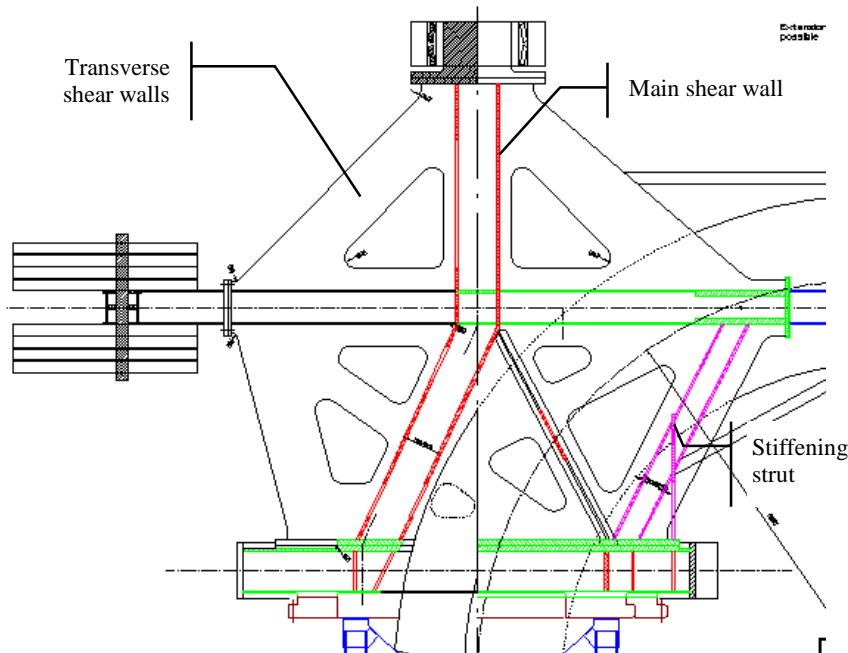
Horizontal gantry section parallel to the transverse shear walls (horizontal gantry position). Holes are cut into the sheets where structurally feasible in order to reduce the dead load and facilitate the assembly process (welding).
